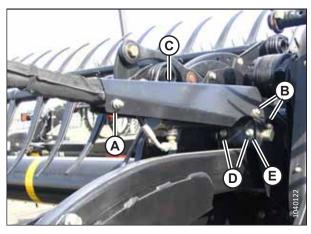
Right Reel Arm Cylinder in Forward Position
